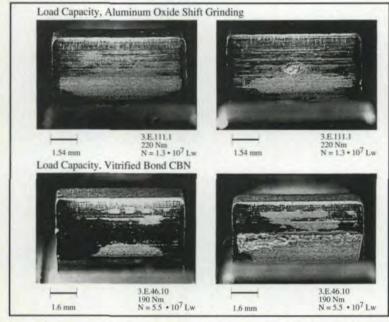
Wear and pitting on aluminum oxide and CBN ground gears (Variants 111, 46).
